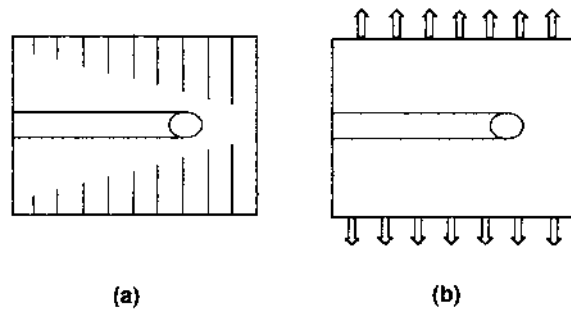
Comparison of hot crack weldability tests for thin sheet: (a) Houldcroft Test; and (b) Sigmajig Test.
